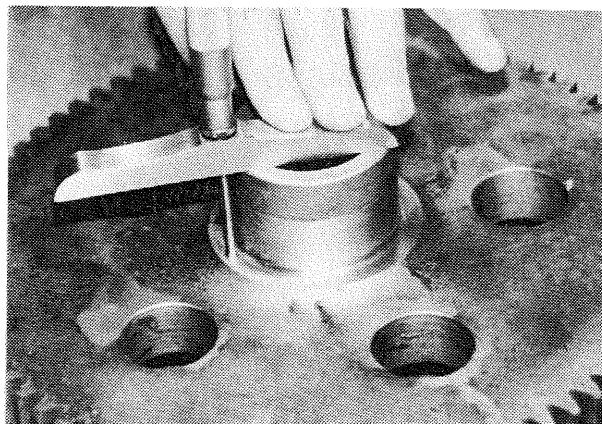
Ring Gear, Pinion & Drum Shaft (3 of 5)
